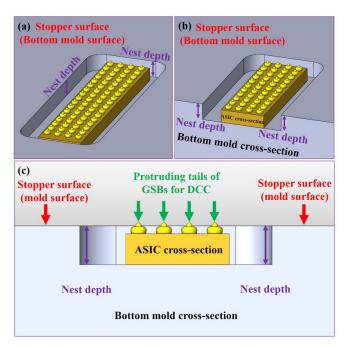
DCC process. (a) A chip is placed inside a nest (cavity) with known depth that is formed inside a rigid bottom mold. The top surface of the mold is the stopper surface during the DCC process. The depth of the nest defines how much displacement deformation will be applicable on the uncoined stud bumps. (b) Cross-section of the nest where the chip with uncoined stud bumps is positioned. (c) Cross-sectional view showing the uncoined or protruding tails of GSBs that need to be coined to adjust the needed surface area/bump and pressure/bump that is needed in the coming TSFCB process step under limited maximum applicable force configuration of the FCB tool.
